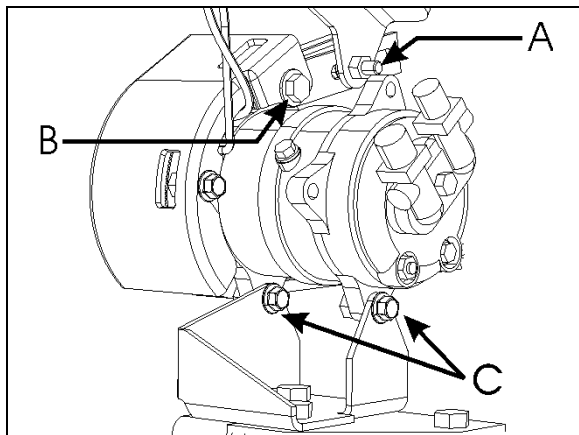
COMPRESSOR REMOVAL OR INSTALLATION 22349
